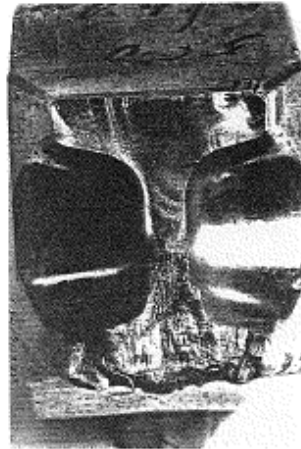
Fracture initiation area with fatigue failure fracture surface and adjacent force-failure fracture surface.
